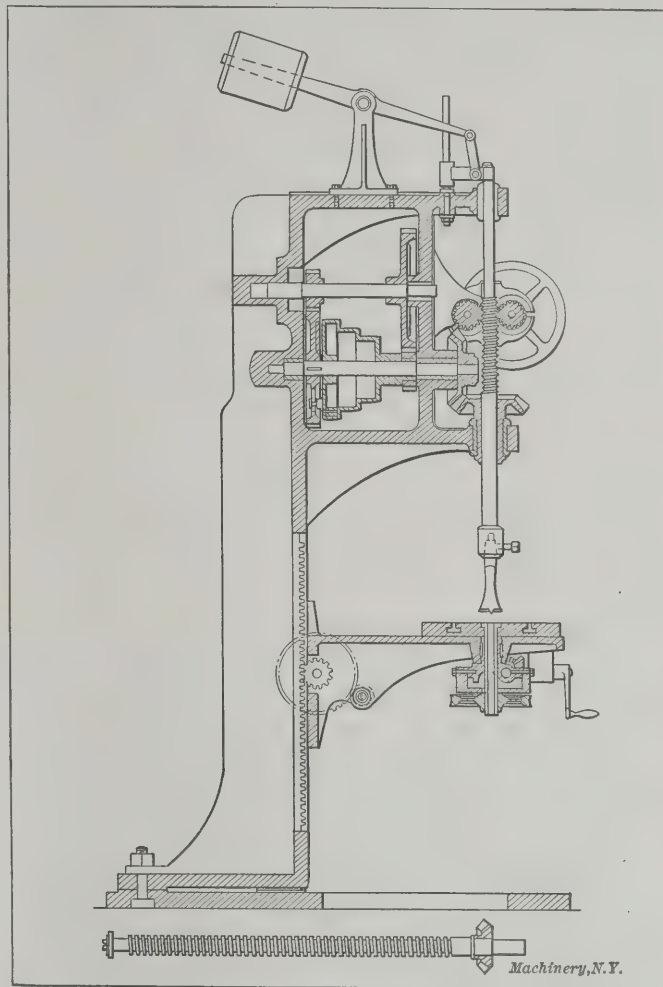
Vertical Drilling Machine with Screw Feed and Worms Joseph Whitworth & Co. (About 1846)
